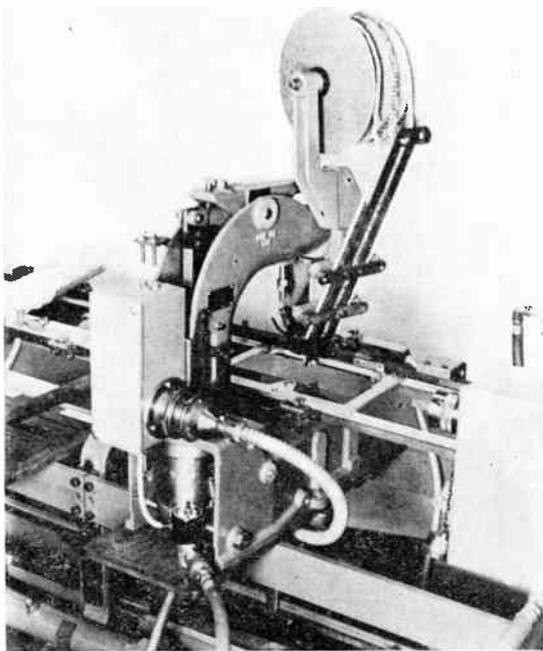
A rear view of an Axial-Lead Component Inserting Machine about to place a component. The inserting head has been rotated to align the component leads to the appropriate holes in the printed wiring board.
